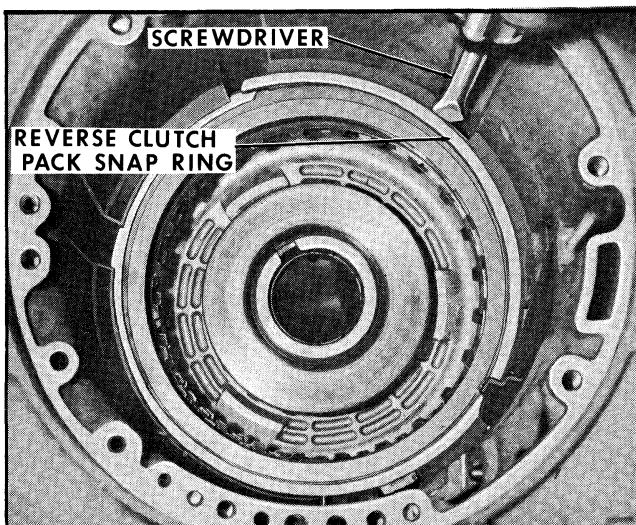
B-62 Removing Reverse Clutch Pack Snap Ring
